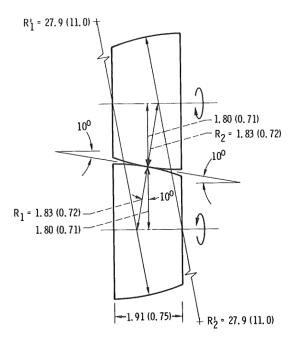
Contacting disk geometry (ref. 10). (All linear dimensions in cm (in.).)
